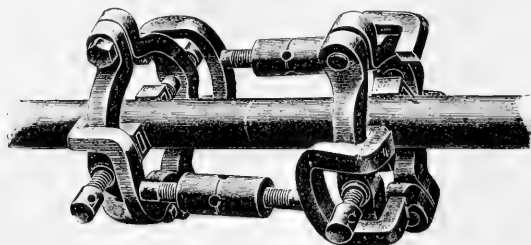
The clamps used for welding tubes up to four inches in diameter.
